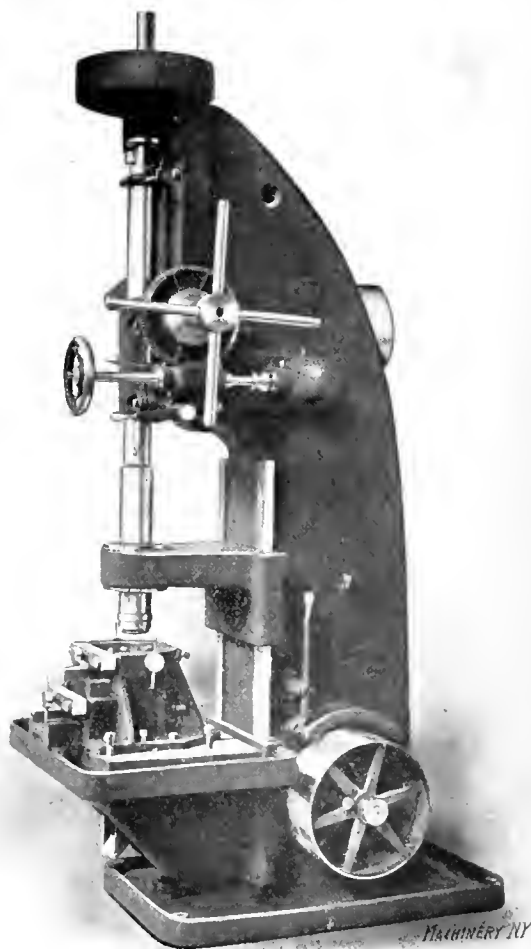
Side View, showing Single Pulley Drive, Boring Bar Support, etc. be carried by each spindle, thus materially increasing the capacity of the machine.
